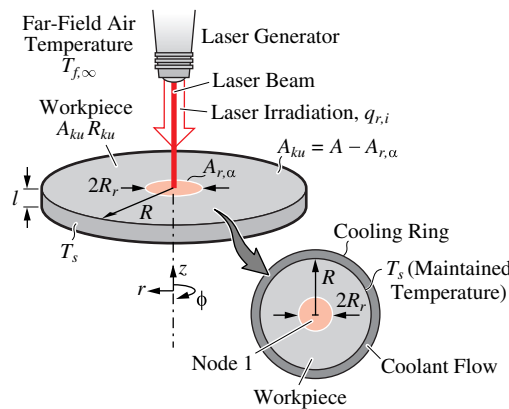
(a) A porcelain workpiece is irradiated for ablation. The workpiece is cooled at its periphery by a coolant carrying ring.
